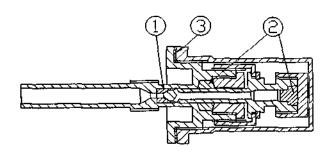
Fill & Drain Valve. 1: Primary seal; 2: Secondary seals; 3: Third seal.
